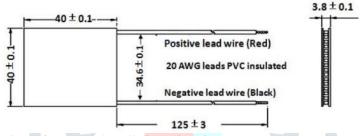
Dimensions of TE Module (All dimensions in mm) (courtesy : TEC1-12706 Datasheet)
